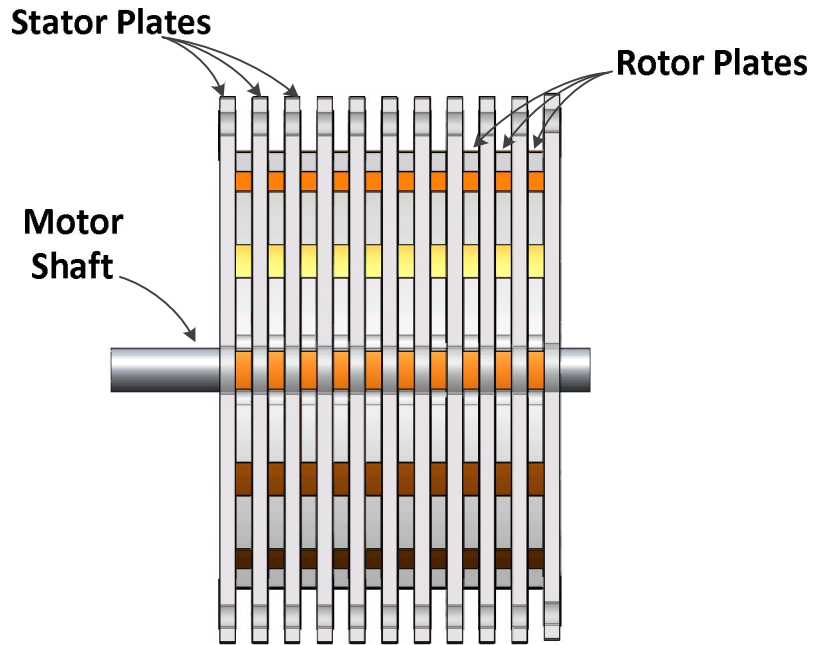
Profile View of Shaft with Rotor and Stator Plates
